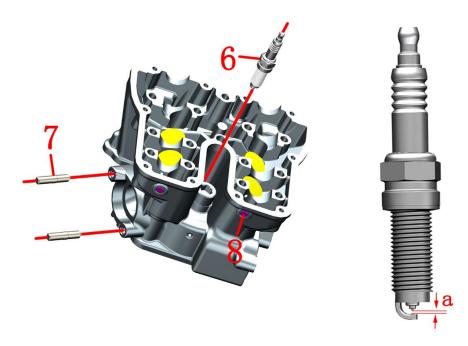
CYLINDER HEAD	Remove the cylinder head 3	CHK	(0)
